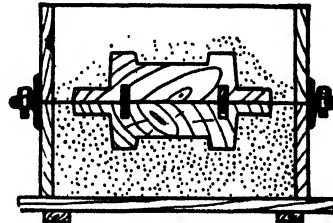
Filling the Cope (Hollow Cylinder Casting).
